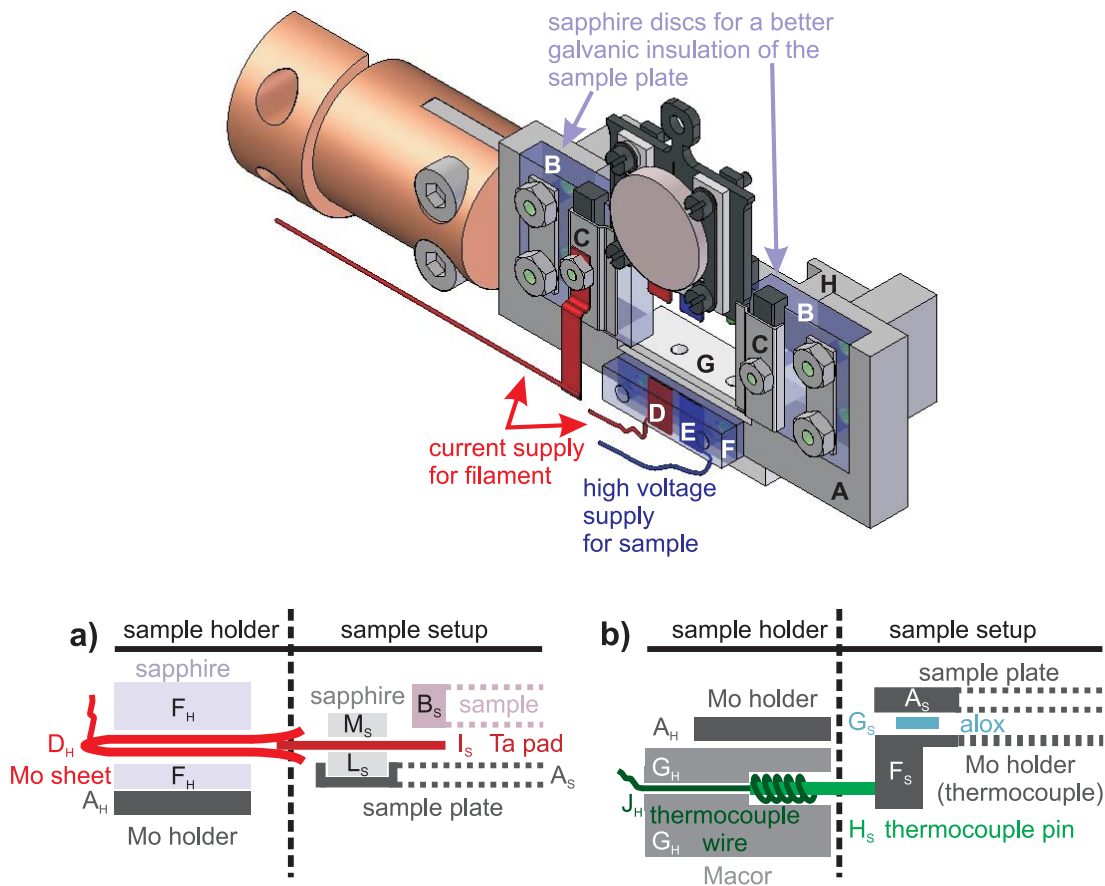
Sample holder in the preparation chamber; a) details of the power connections between the cryostat and sample, b) details of the thermocouple connection; the subscript ‘S’ denotes parts of the sample setup, ‘H’ those of the cryostat holder.
